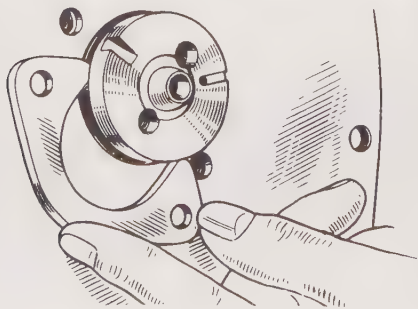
37 Fitting thrust plate behind camshaft boss.
